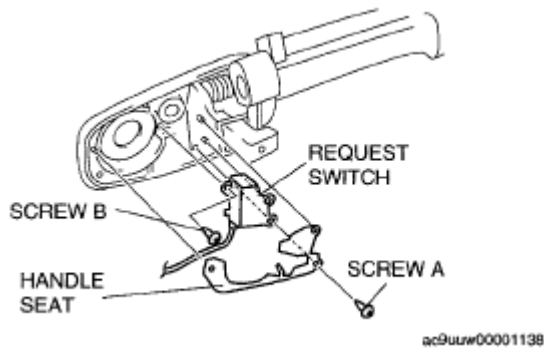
Identifying Request Switch & Handle Seat With Screws
